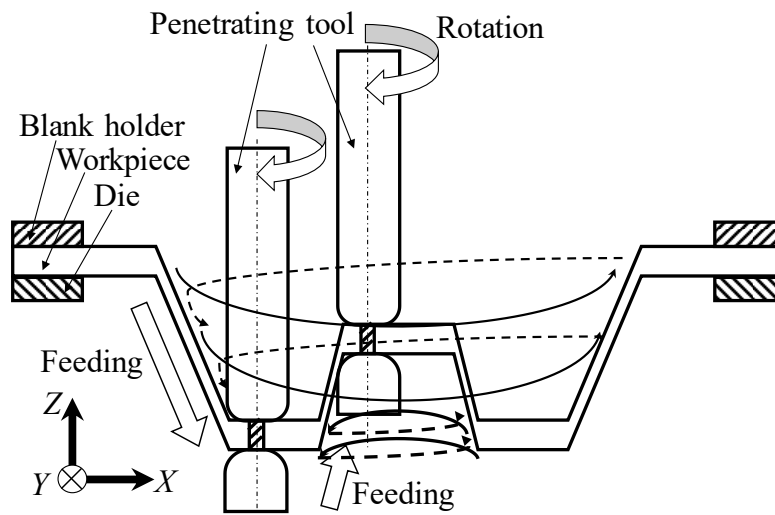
Schematic illustration of penetrating tool friction stir incremental forming.
